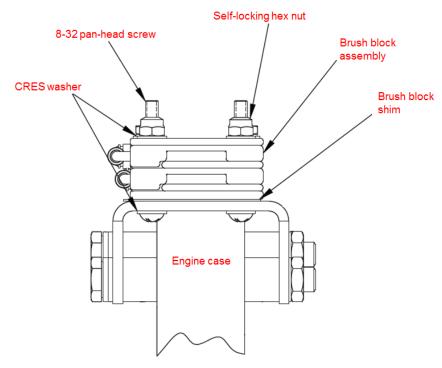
Brush Block Assembly Hardware Detail - View Looking Aft
